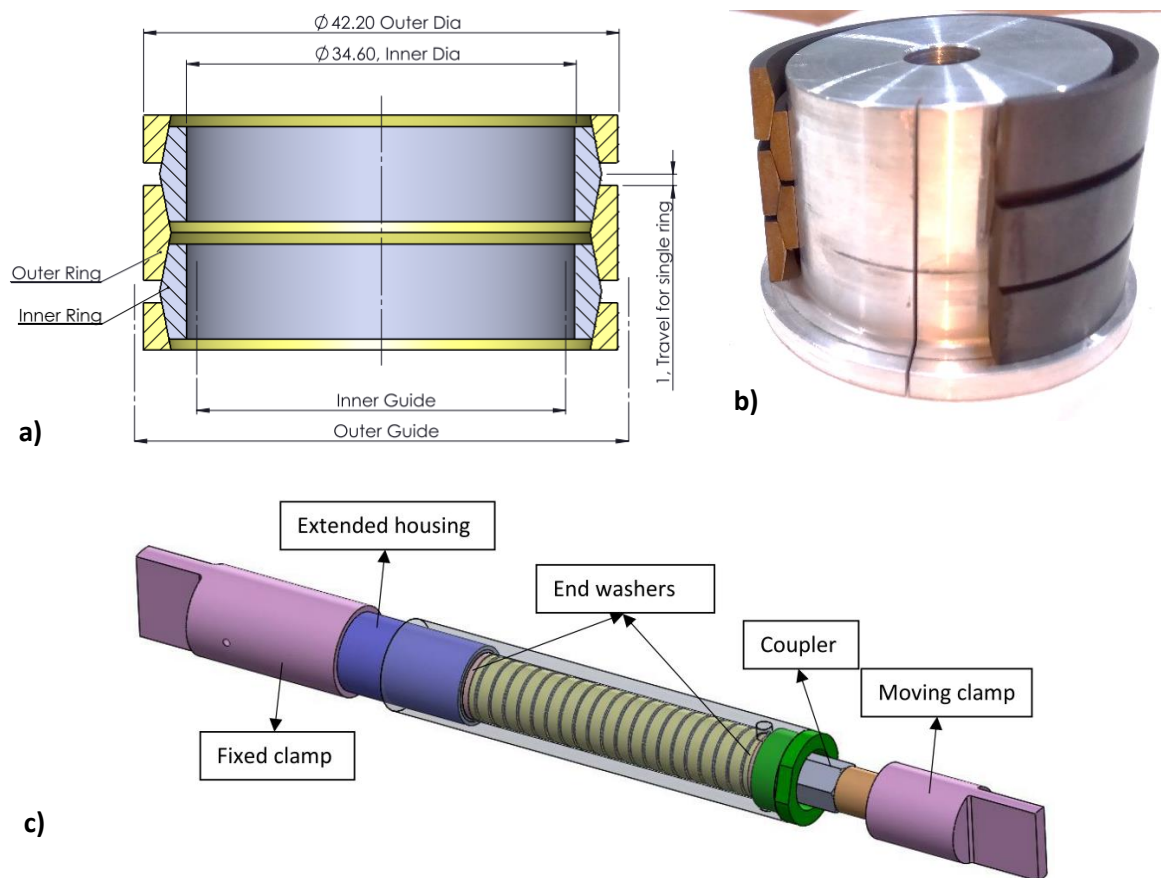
Cross-sectional view of the rings (a, b) and prototype ring-spring device (c)
